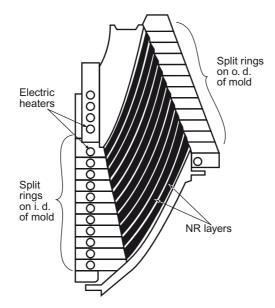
Cross-section of a rocket nozzle bearing in its mold
